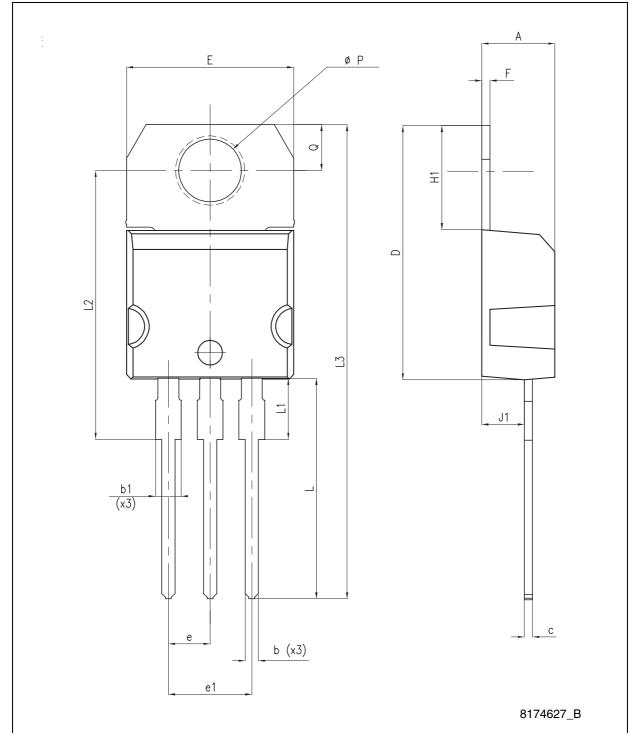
Drawing dimension TO-220 (type STD-ST Single Gauge)
